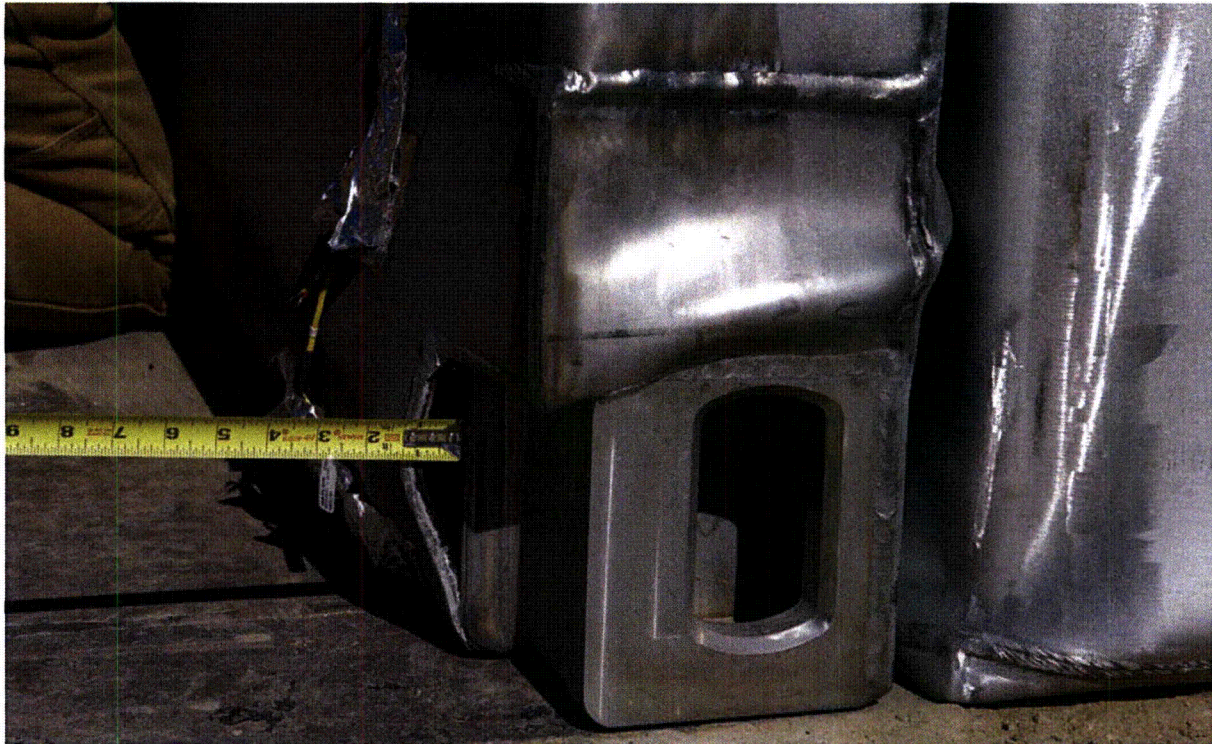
Test LD2, Close-up of Deformation and Torn Welds Around ISO Fitting
